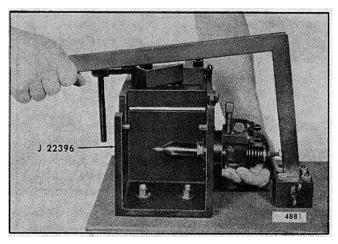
Checking Rack and Plunger For Free Movement using Tool J 22396
